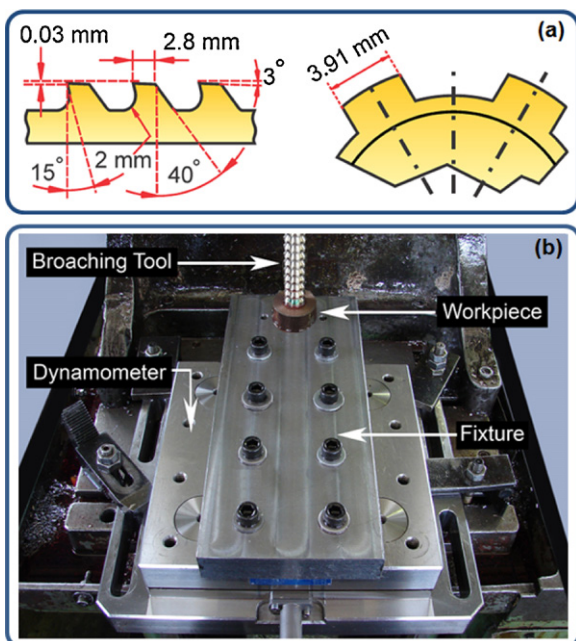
(a) Geometry of the broaching tool, (b) Experimental setup.
